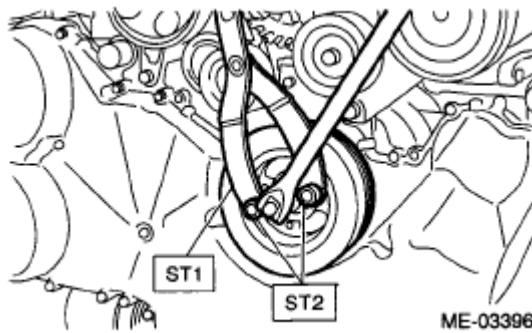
Identifying Pulley Wrench And Pulley Wrench Pin Set
